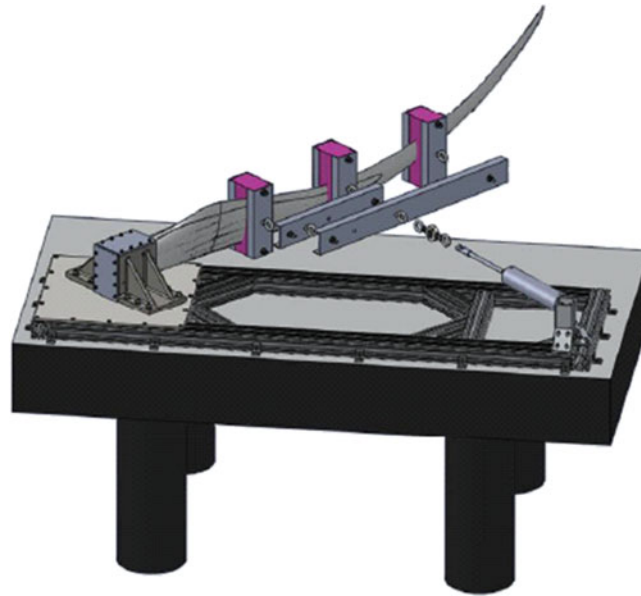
Test rig including the mounting fixture, turbine blade, whiffle tree, and pneumatic actuator
